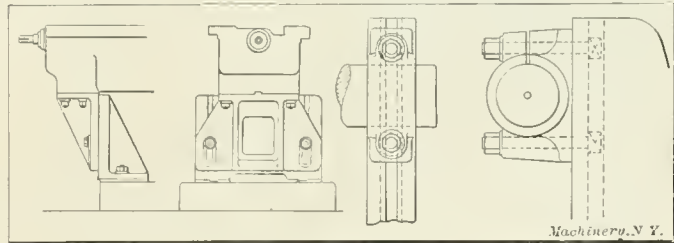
Typical Support for Knee. Fig. 23. Split Bearing for Clamping Overhanging Arm
